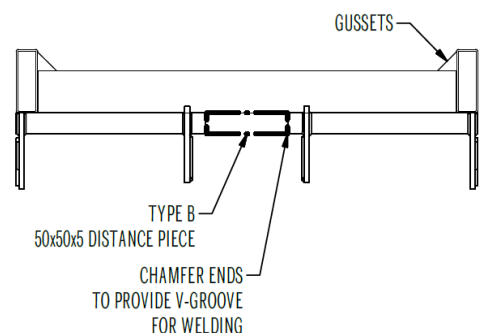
RECOMMENDED CROSSMEMBER REINFORCEMENT METHODS
